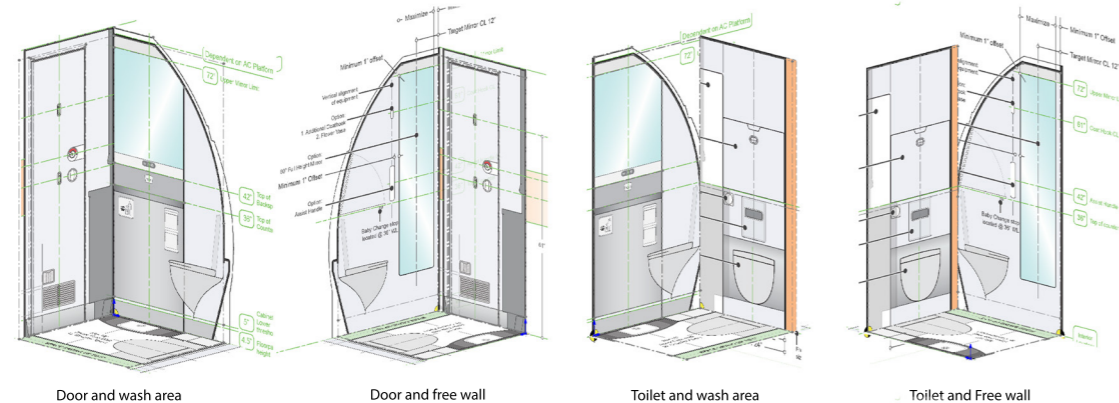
Standard lavatory dimension interfaces used for CAD modeling
